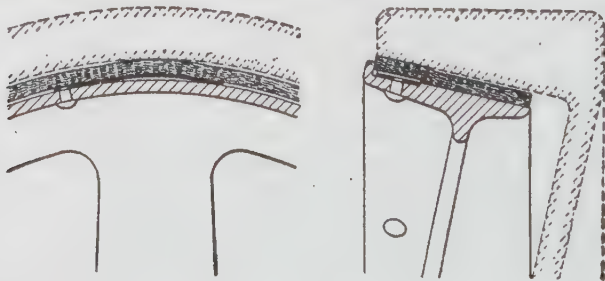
FLAT SPRING UNDER CLUTCH FACING.
